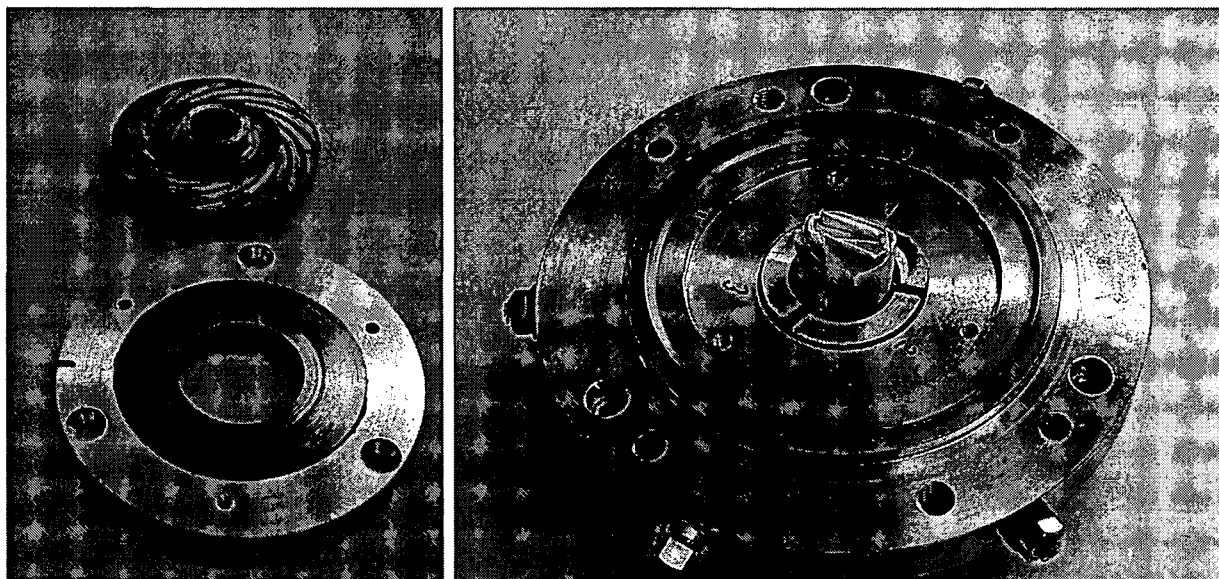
left:* Dismantled thrust bearing showing its spiral grooves. *right:* The back flange for the fixation of the disk of the radial bearings showed some grease after disassembling in the end of the ageing test.
